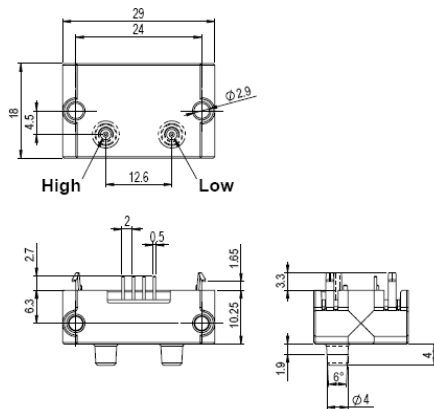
SDP60x/SDP50x manifold mount version. All dimensions are in mm.
